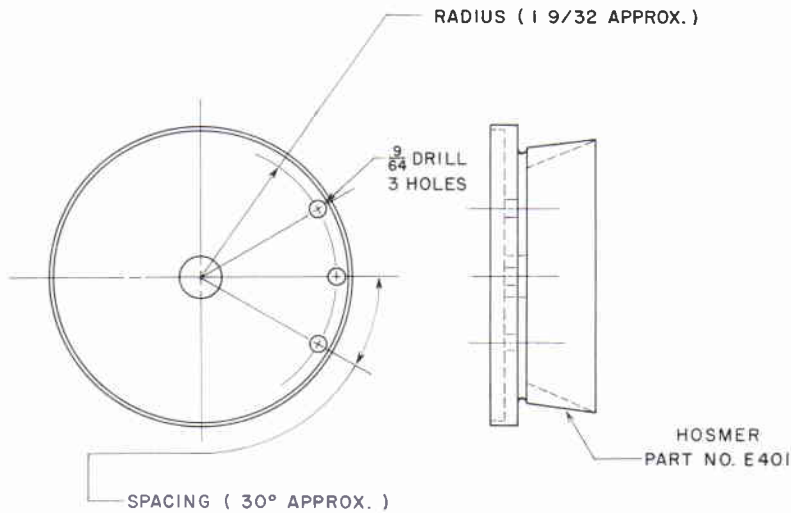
Drawings of modified turntable. The radius of the indexing holes may be determined by using a $\frac{1}{8}$ -in. diameter scriber in the lock base mounted on the elbow and scribing directly on the turntable. The amputee can best select the locking positions after completion of the socket.
